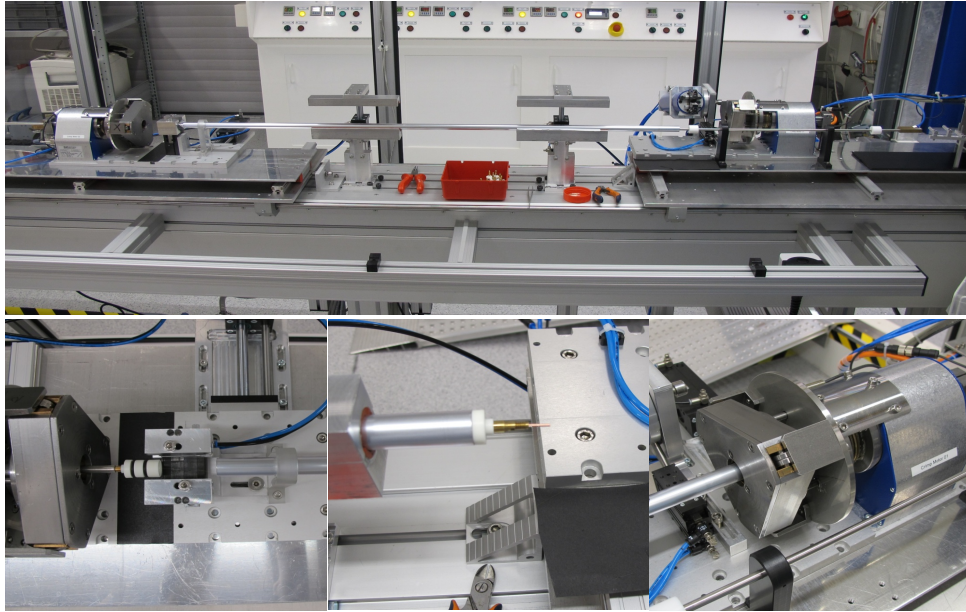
Wiring machine (top) with closeup of the endplug before insertion into the tube (bottom left), after insertion (bottom center), and component which affixes the endplug into the tube (bottom right).
